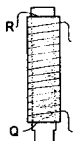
SLUG TUNER ASSEMBLY (Rear View)
